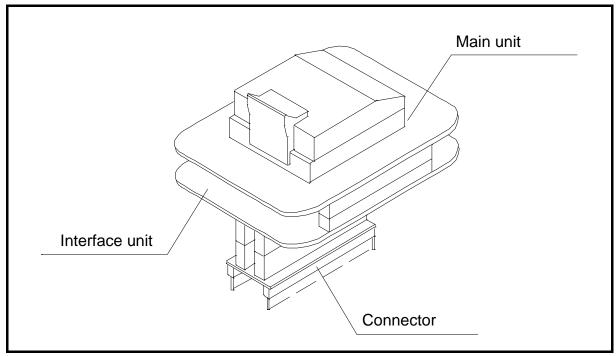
External view of the programming adapter (QFP, SOP, LCC type IC socket) and constituent parts
